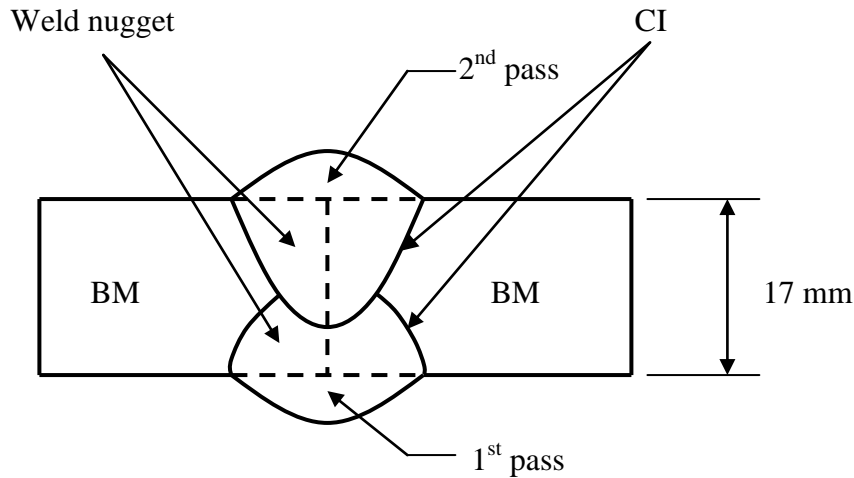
Schematic drawing showing a cross-section view of a butt weld joint geometry (BM = base metal, CI = cooling interface).
